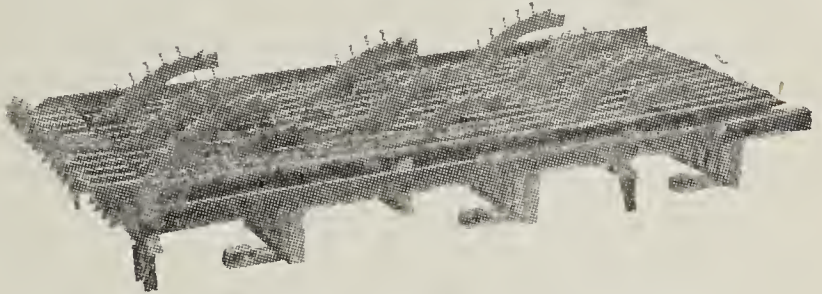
STRAW RACKS OF AULTMAN & TAYLOR MACHINE.
